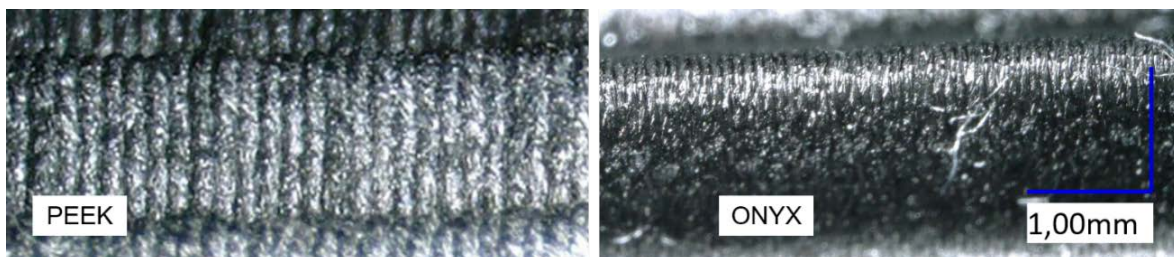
PEEK and ONYX tooth flank surface before test runs at 50X magnification. The print layers are easily distinguishable. The smaller layer height on Onyx gear causes a smoother surface.
